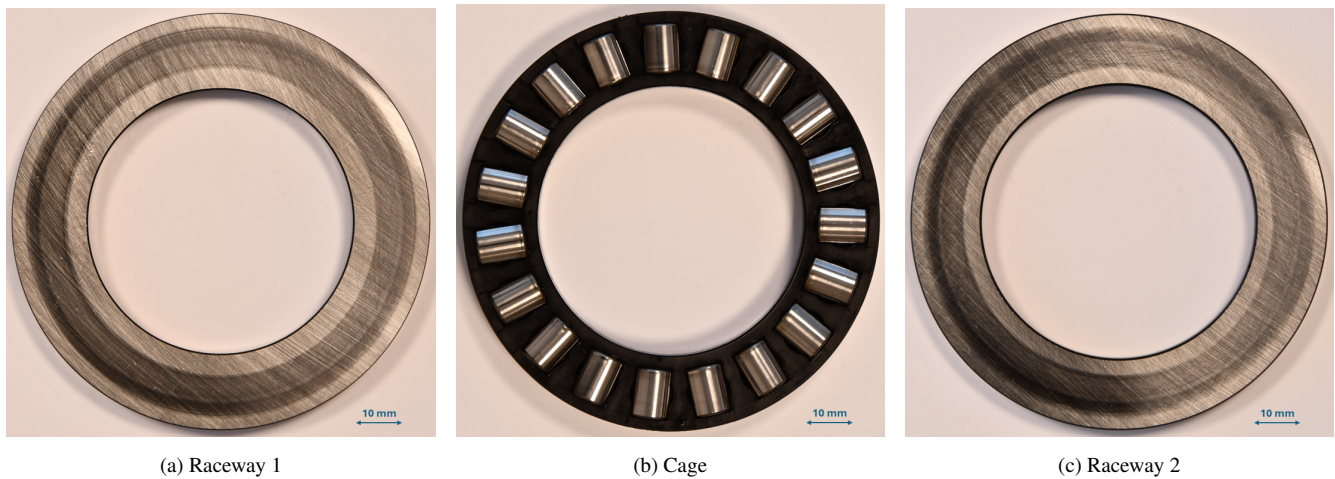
Pictures of bearing components for Bearing 1 of T05. Refer to Table 5 for designation of tests. The outer diameter of the bearing is 95 mm and the diameter and length of the rollers are both 11 mm.
